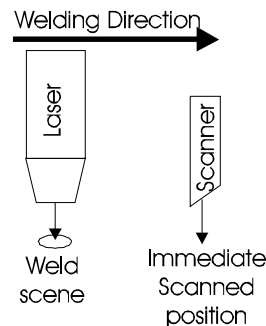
Set-up of weld tool and optical sensor.
